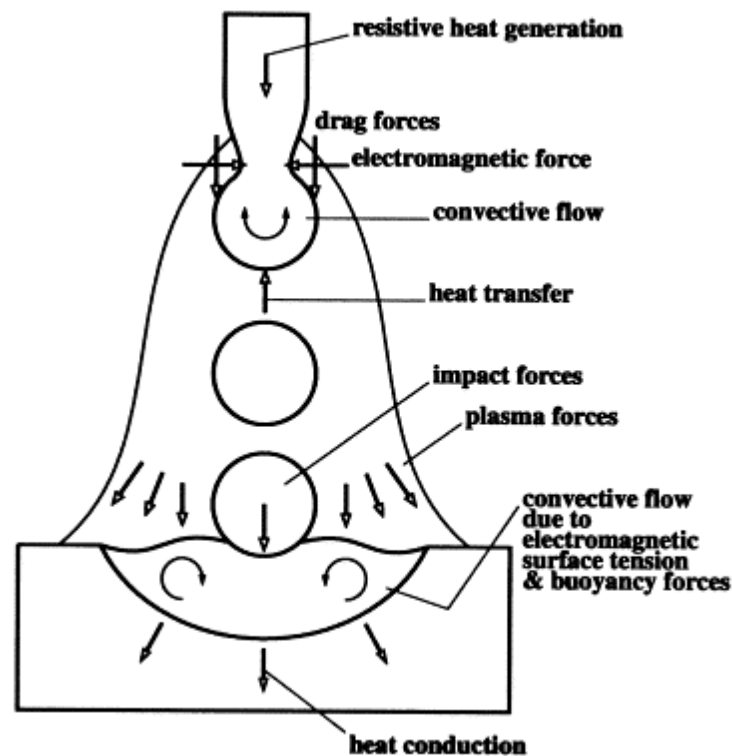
Mechanism of molten metal transfer in arc welding
